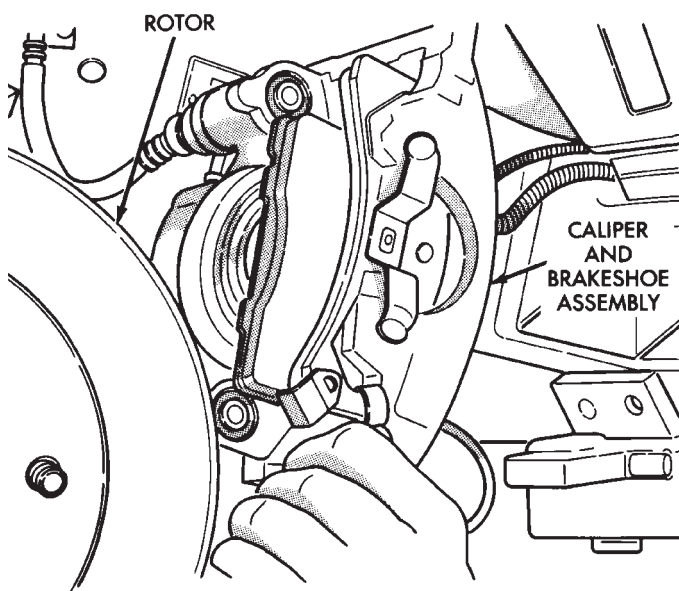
Caliper Mounting Bolt (1/2 Ton)
